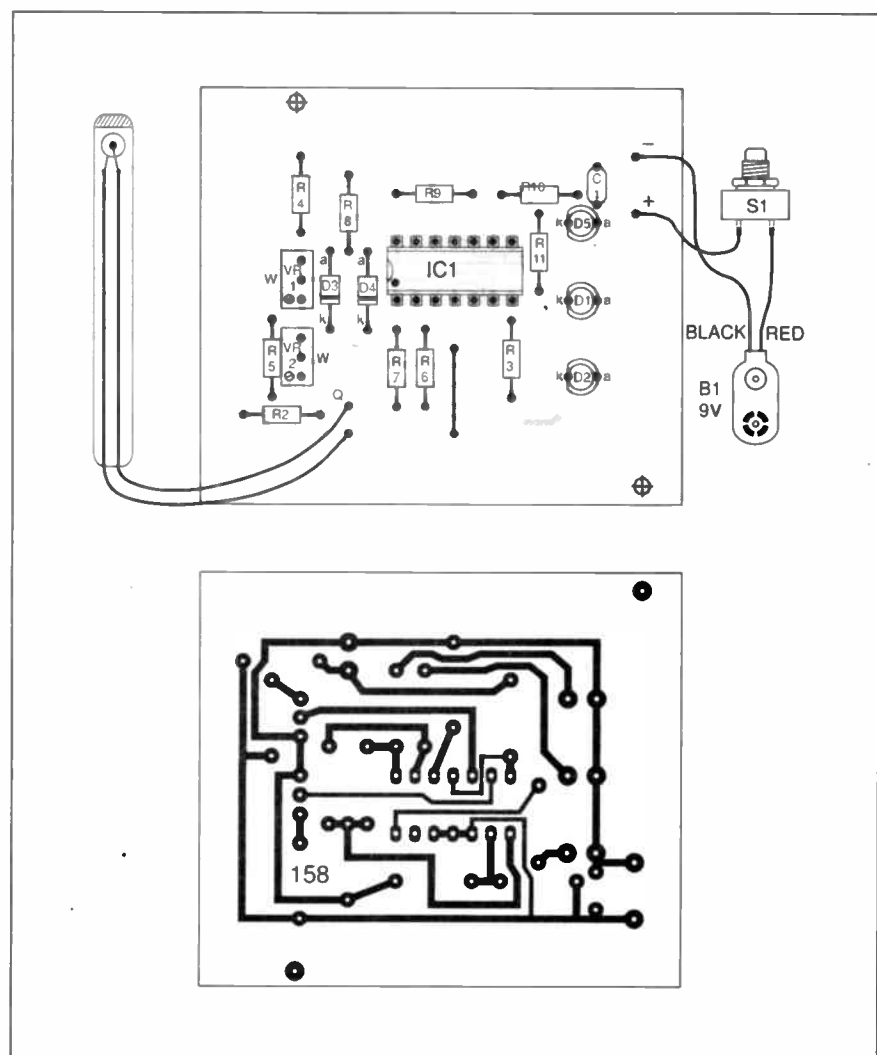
Thermometer printed circuit board component layout, interwiring and full size copper foil master pattern.
